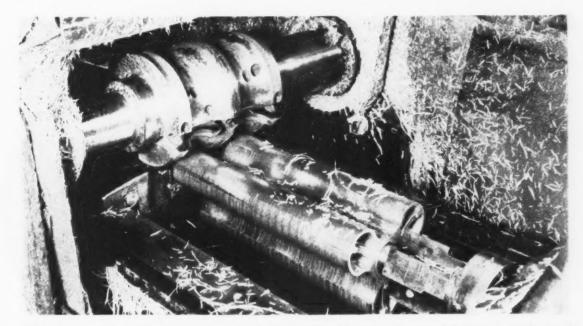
Final milling of lobes is done in a setup similar to that in Fig. 1 but the cutter has inserted carbide tipped blades and turns at higher speed. Cutter turns at 1000 rpm, work fed at 6.9 ipm. Finish is 30 microinches.
